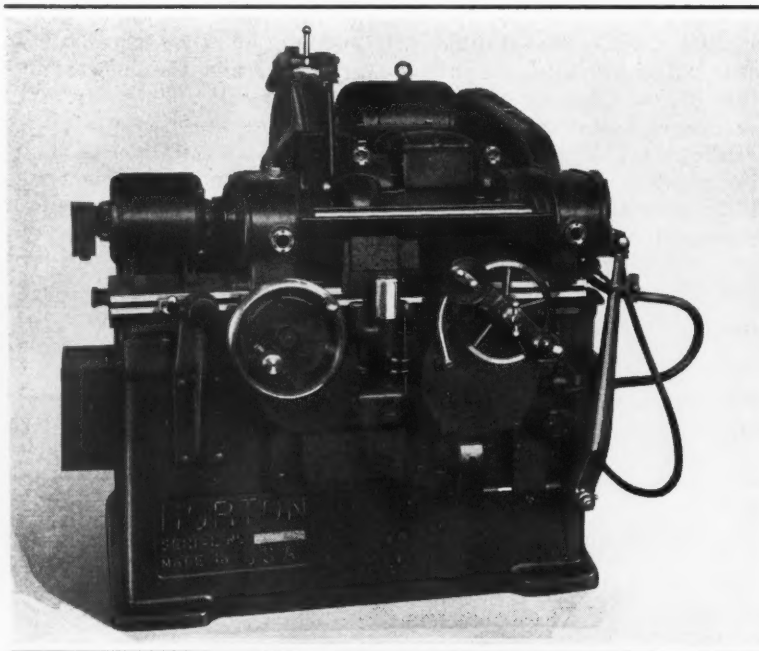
"Cam-O-Matic"—a Machine that Performs Automatically the Movements Required for Grinding All the Cam Contours of Automobile Camshafts
